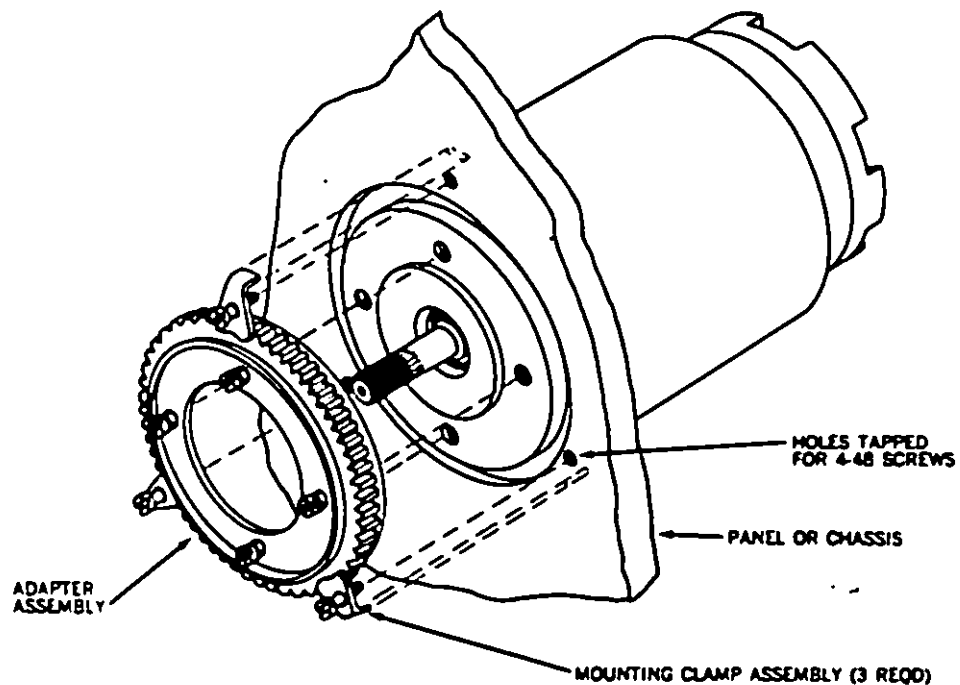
Mounting a synchro using an adapter assembly (from the shaft end).
